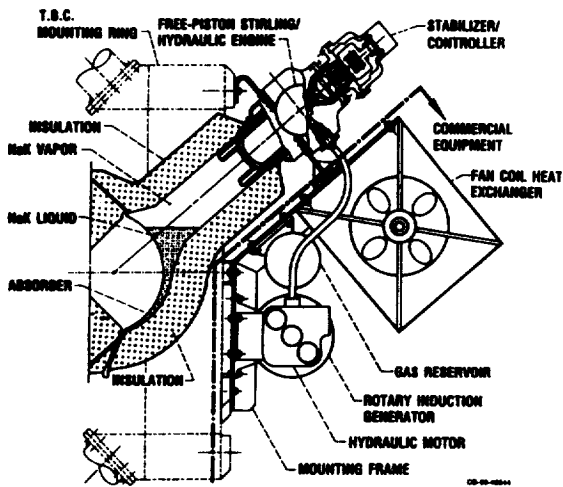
STC'S STIRLING/HYDRAULIC ASCS LAYOUT.
